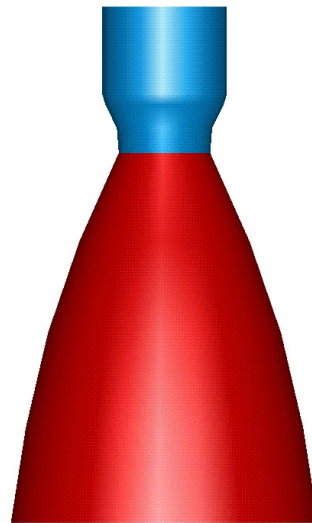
EADS designed combustion chamber and nozzle geometry of the proposed expander bleed-cycle engine (CAD rendering)
